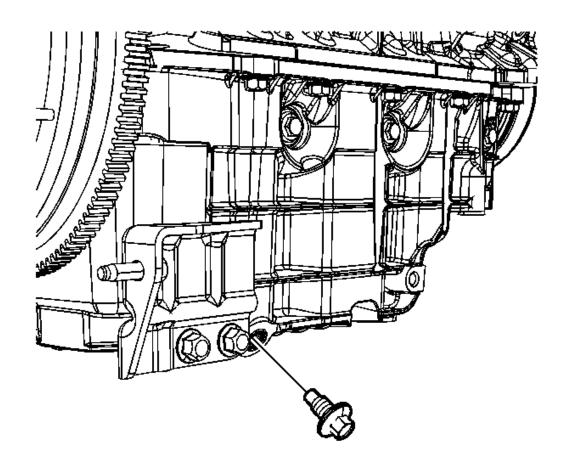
View Of Oil Drain Plug Courtesy of GENERAL MOTORS CORP.
